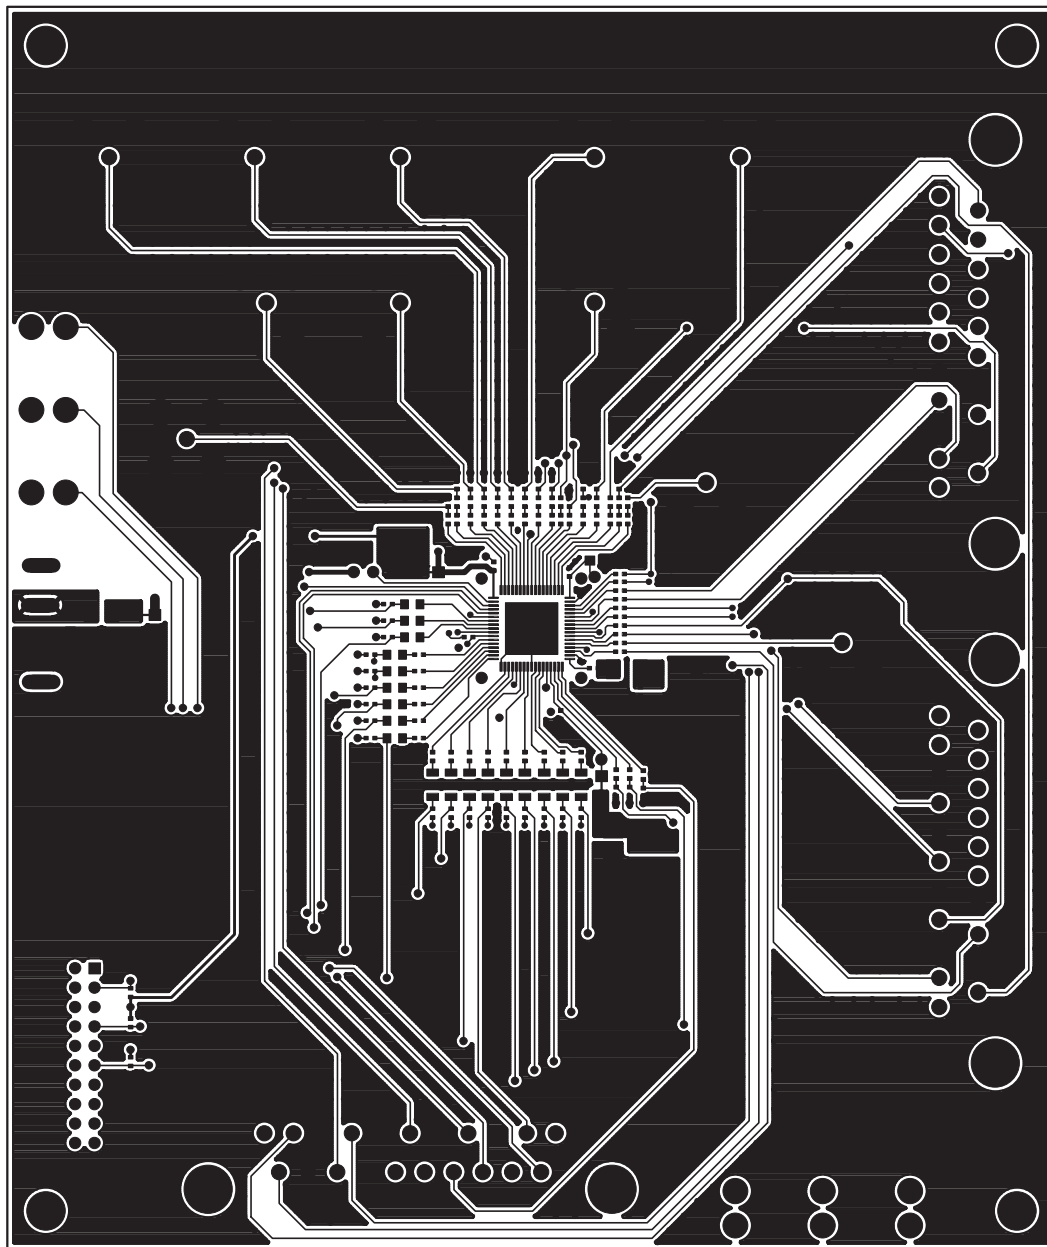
MAX4399 EV Kit PC Board Layout—Component Side
